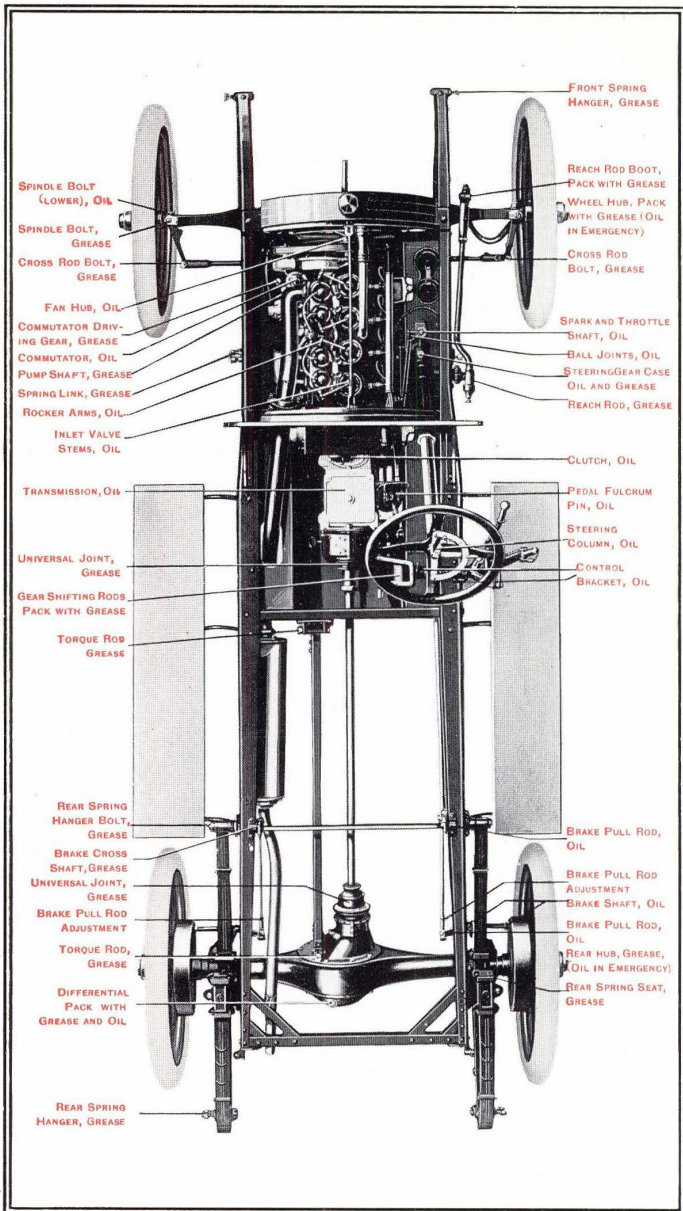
Plan View of Chalmers "30," showing where to lubricate and what to use, oil or grease
